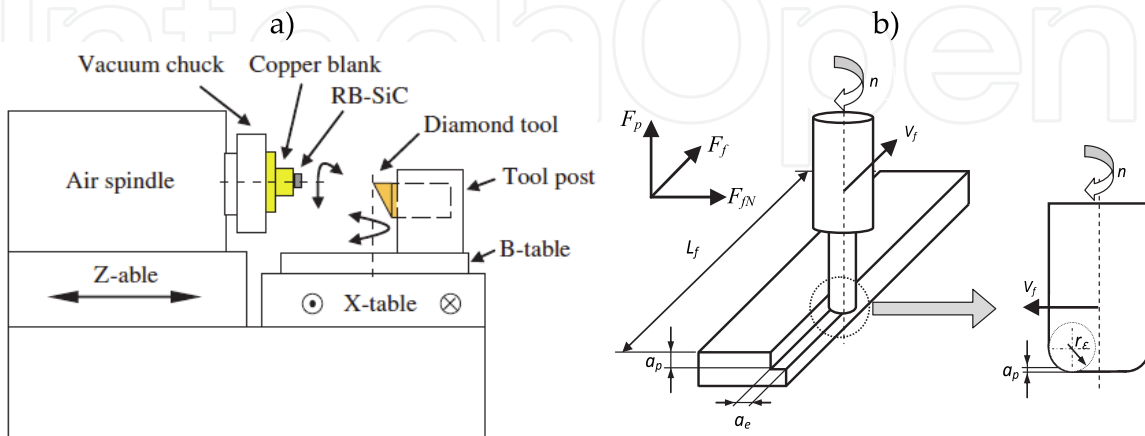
The set-up of cutting process: a) ductile turning of carbides [15], b) face milling of DLD tungsten carbide [16]
